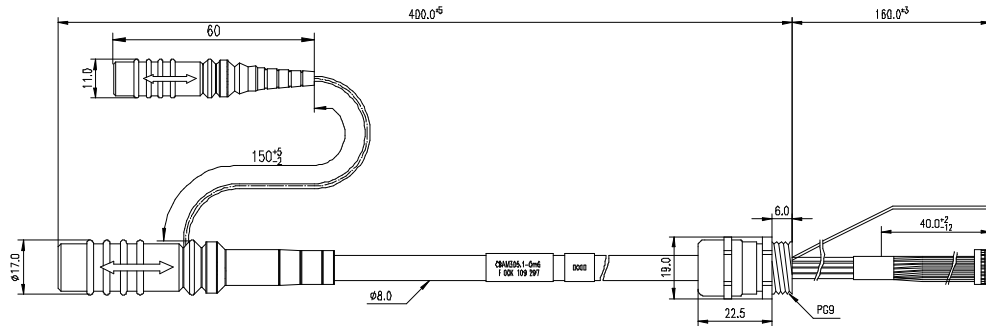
CBAM305.1-0m6 Cable - Dimensions
